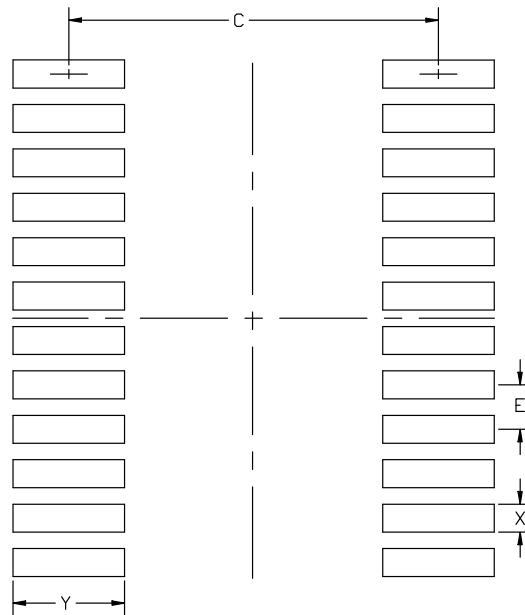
QSOP24 PCB Land Pattern Drawing
